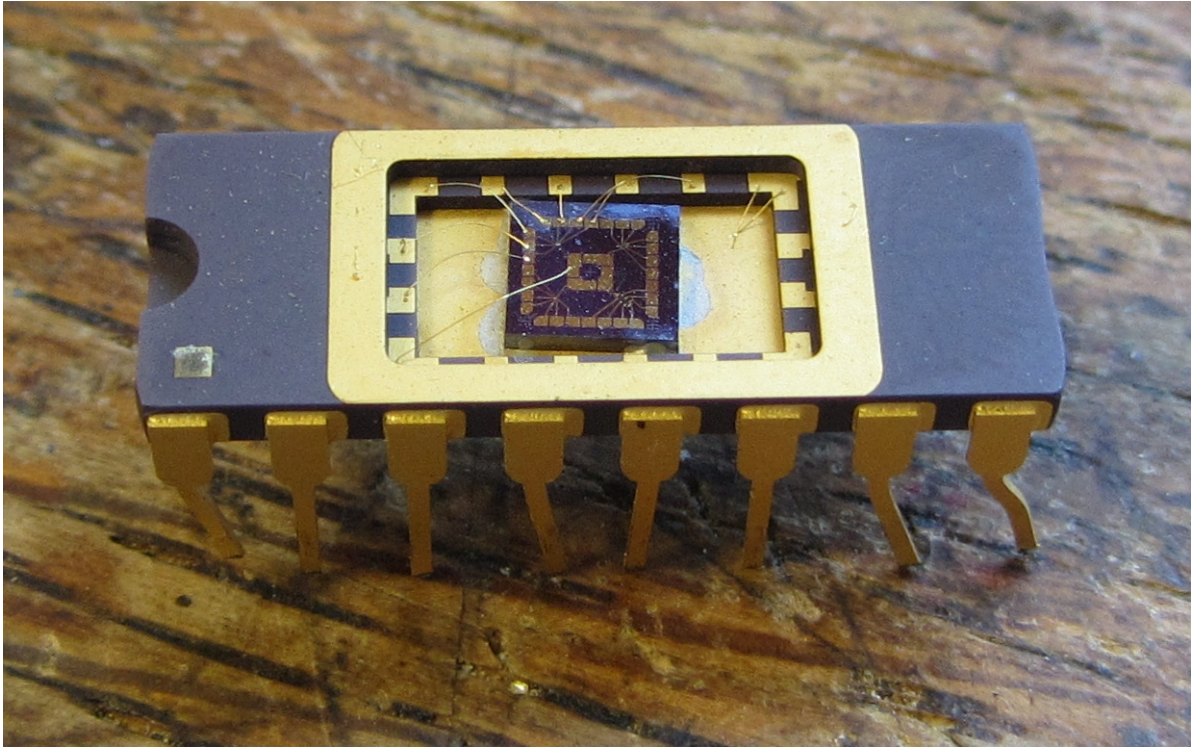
Photograph showing a fully fabricated chip inside a chip carrier. The chip carrier is a leaded ceramic chip carrier with gold contacts. The chip carrier is a standard dual in-line package (DIP), around 2cm in length. Ball bonded $25\ \mu\text{m}$ gold bonds can be seen running from the chip carrier's bondpads to our chip's bondpads.
